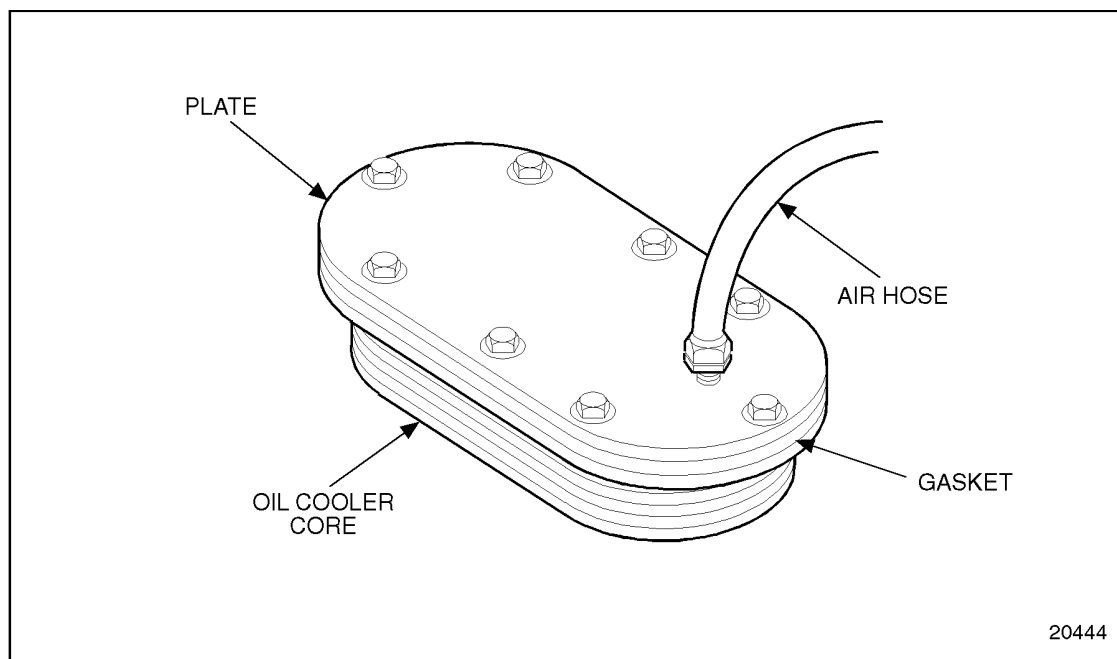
Preparing Oil Cooler Core for Pressure Test
